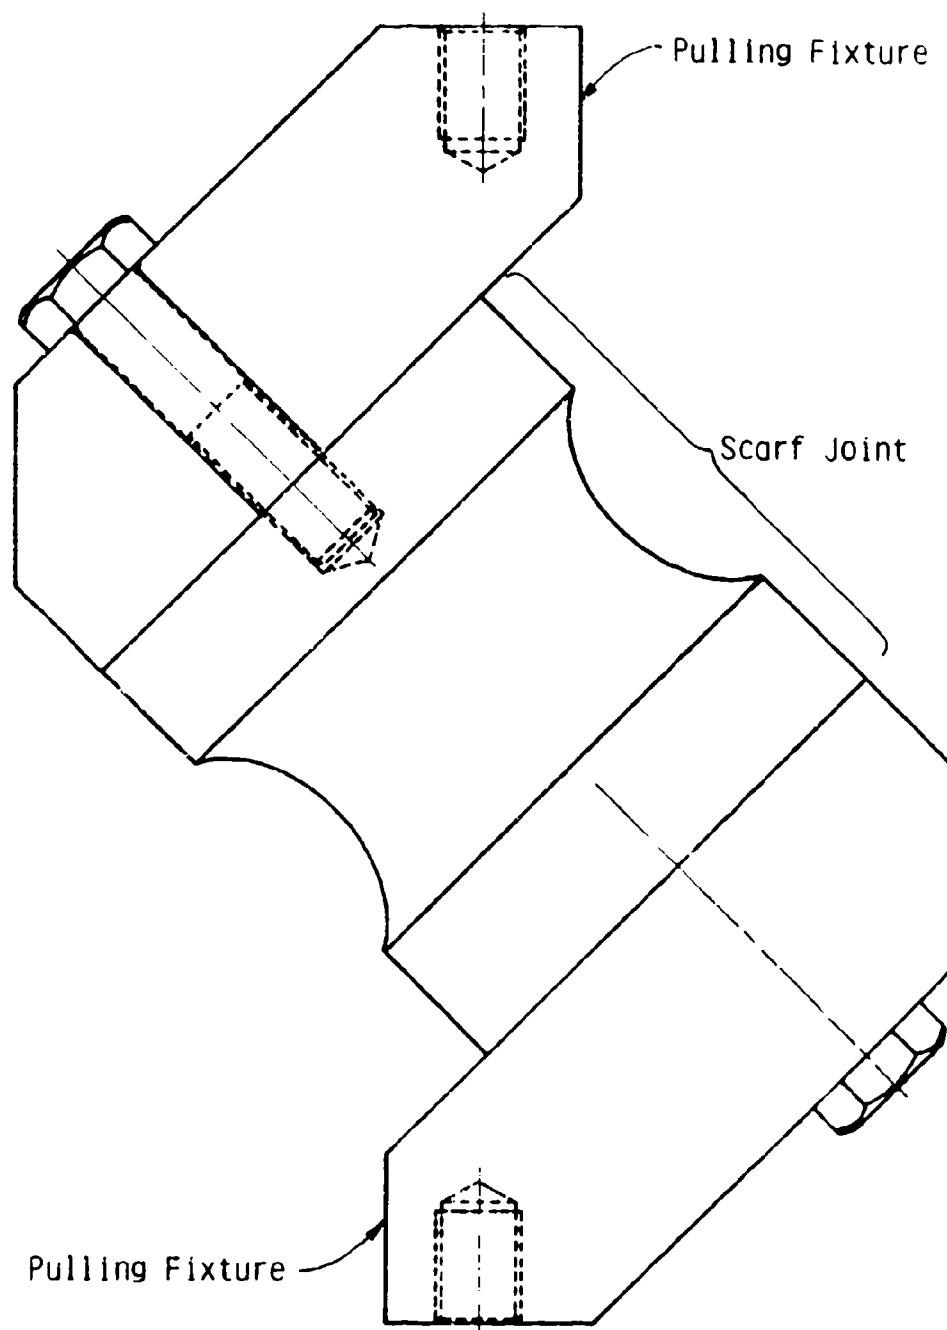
Fixtures for Testing the Scarf-Joint Specimen in Combined Tension and Shear
